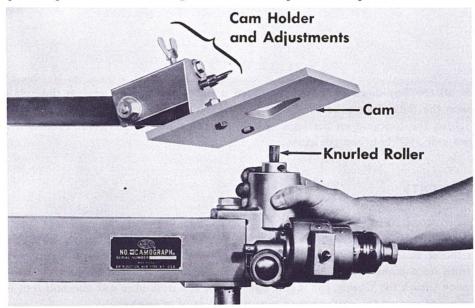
CAM HOLDER AND MAGNETIC TRACER HEAD
